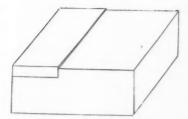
Electrode for welding tools showing sintered tungsten copper insert
